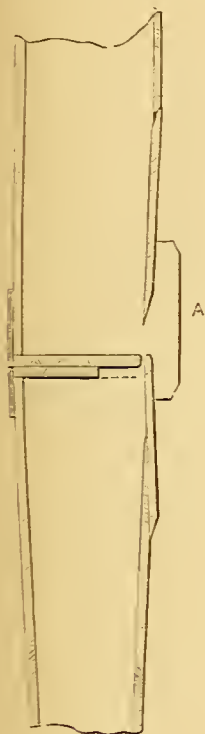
SECTION OF PIPE. FULL SIZE.
